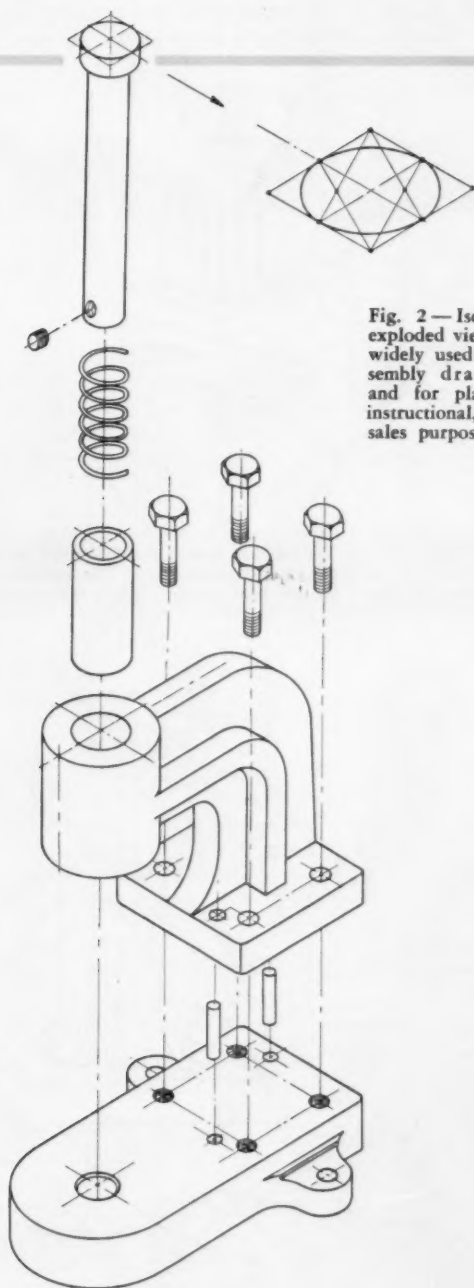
Isometric exploded views are widely used in assembly drawings and for planning, instructional, and sales purposes
